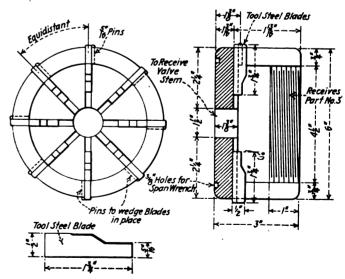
Sketch of the Valve Reamer and Detail of the Blade
